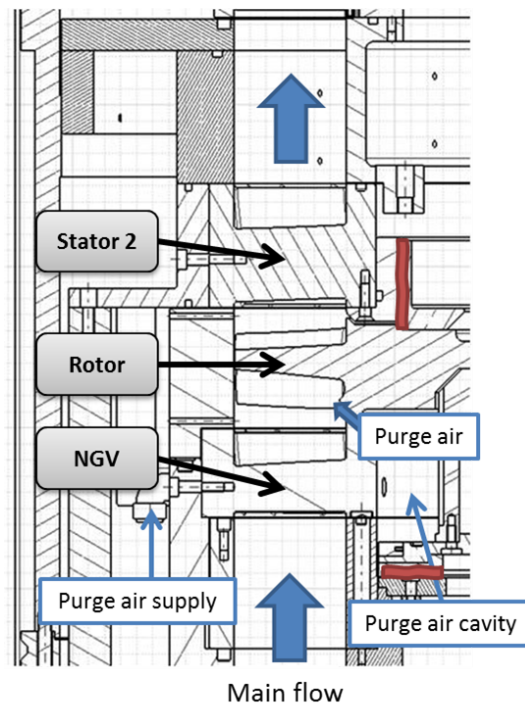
Technical drawing of the test section. The three rows and the purge air system are included. The red patches shows the location of the labyrinths seals that ensure the sealing between the stationary and rotating parts.
